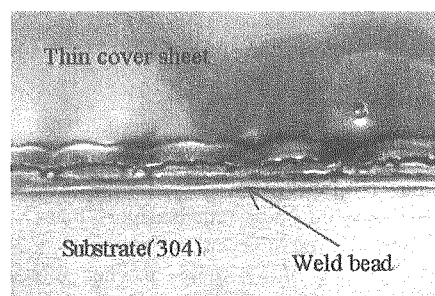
Burn through in repair welding beam diameter: 300μm
